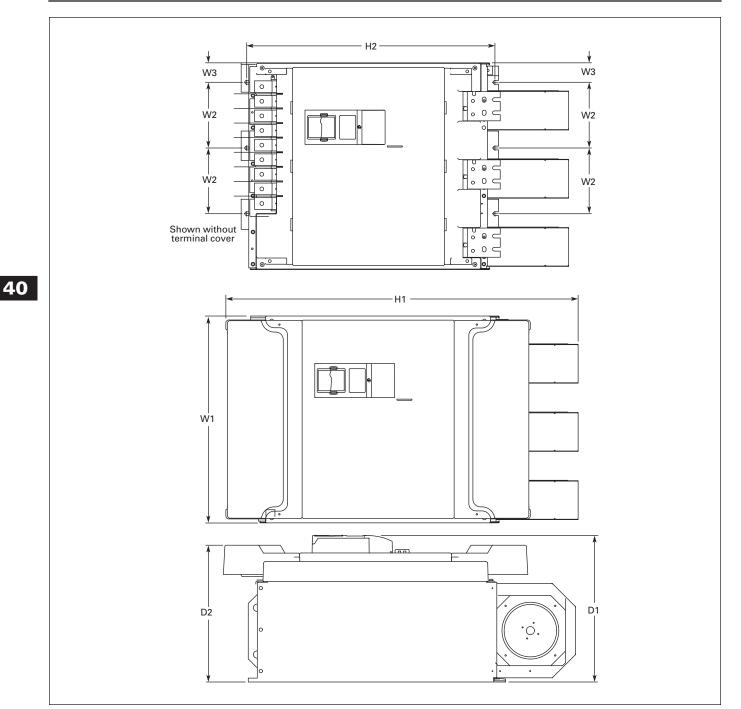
HVX9000 Dimensions, FR11 Open Chassis
